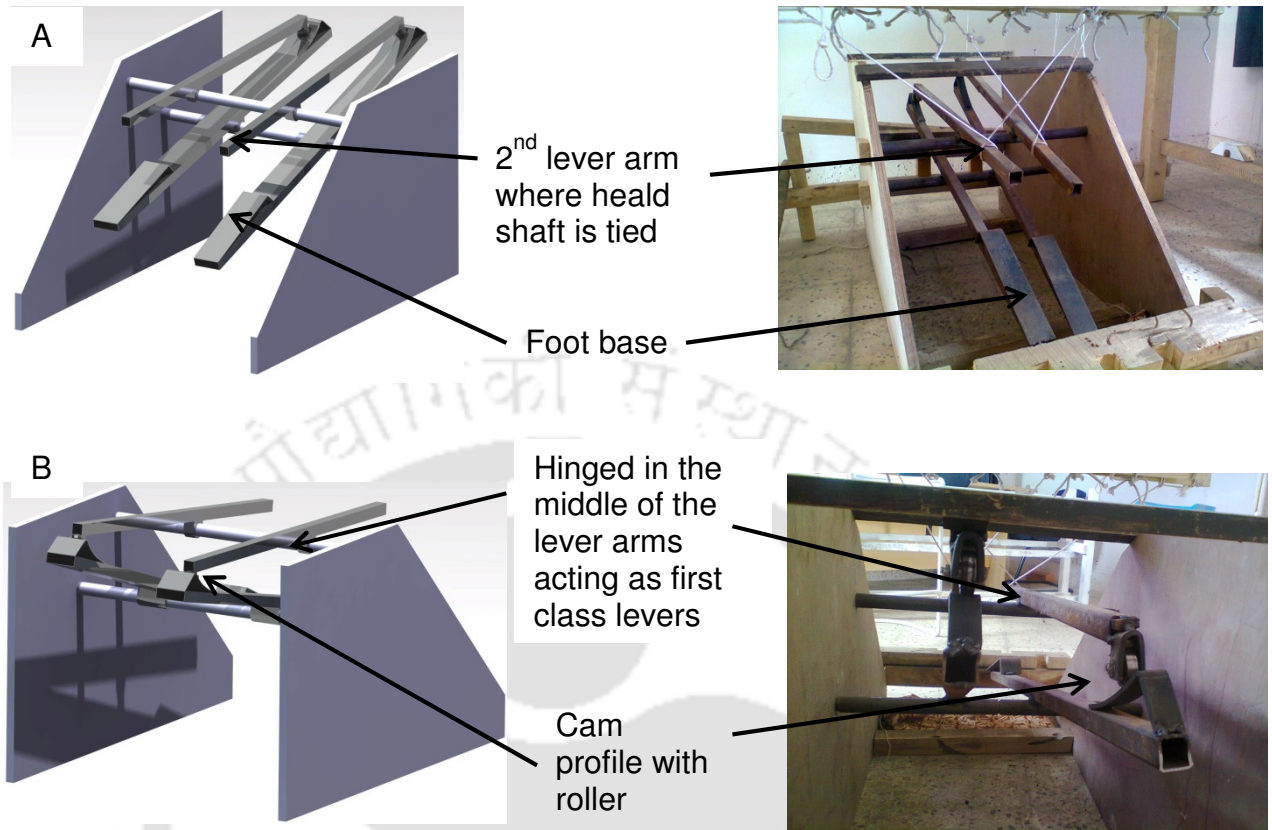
Final pedal design shown in real time and in CAD model defining its different components (A) Front view, (B) Rear view
